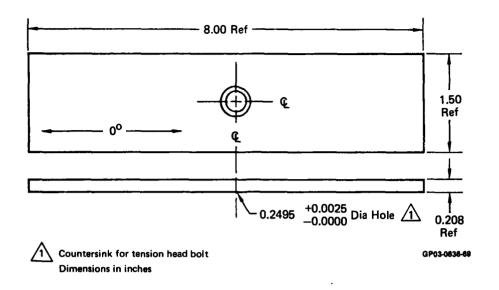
Test Specimen - Unloaded Hole, Fatigue Test (UHFT)
